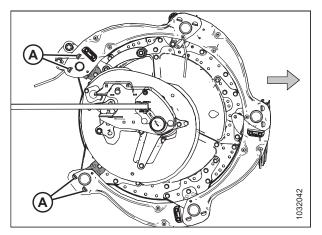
Reel Endshield Removed – Outboard Cam End
